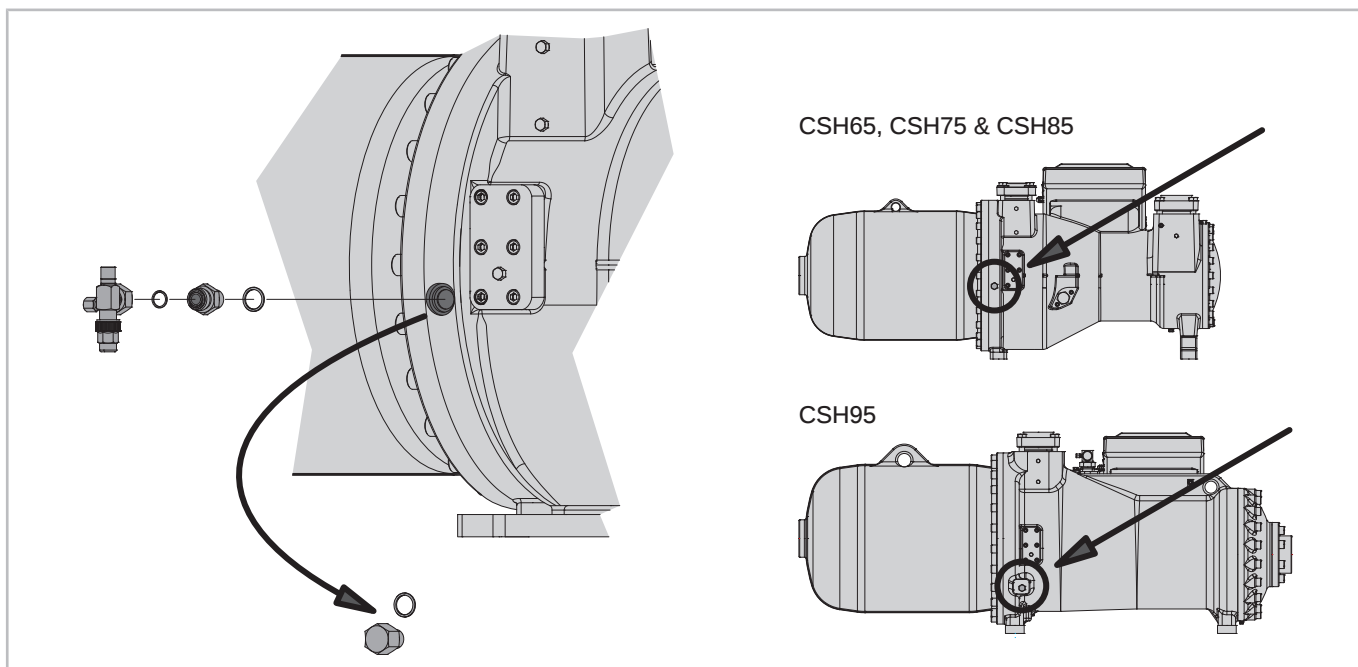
CSH. compressors: connection positions and mounting of LI shut-off valve
